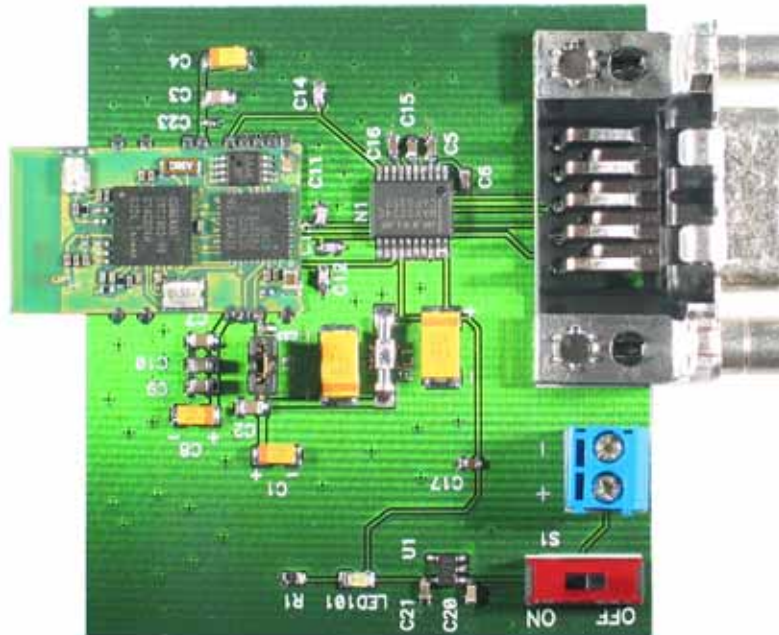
Complete RS232 Adapter board populated with ACL PCB.
